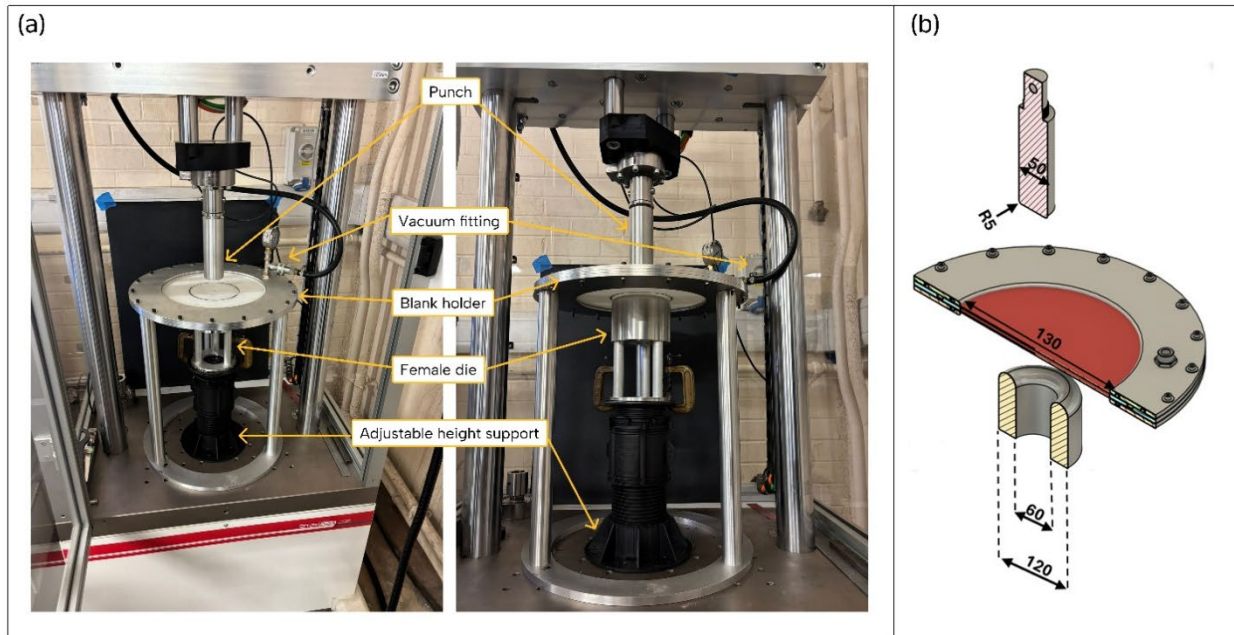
Deep draw test setup with NT blank holder: a) experimental, b) CAD.
